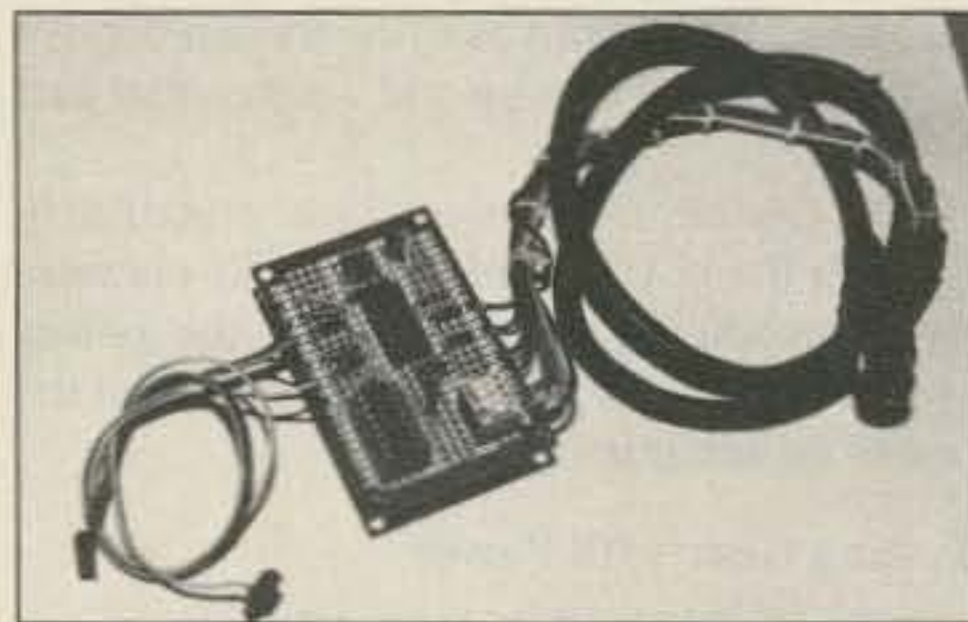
Edge of the Radio Shack #276-150 perfboard, on which the video adapter circuit is wired. Remove the 74LS51 IC from its socket on the motherboard, insert socket plugs, and reinsert the chip into the socket.
